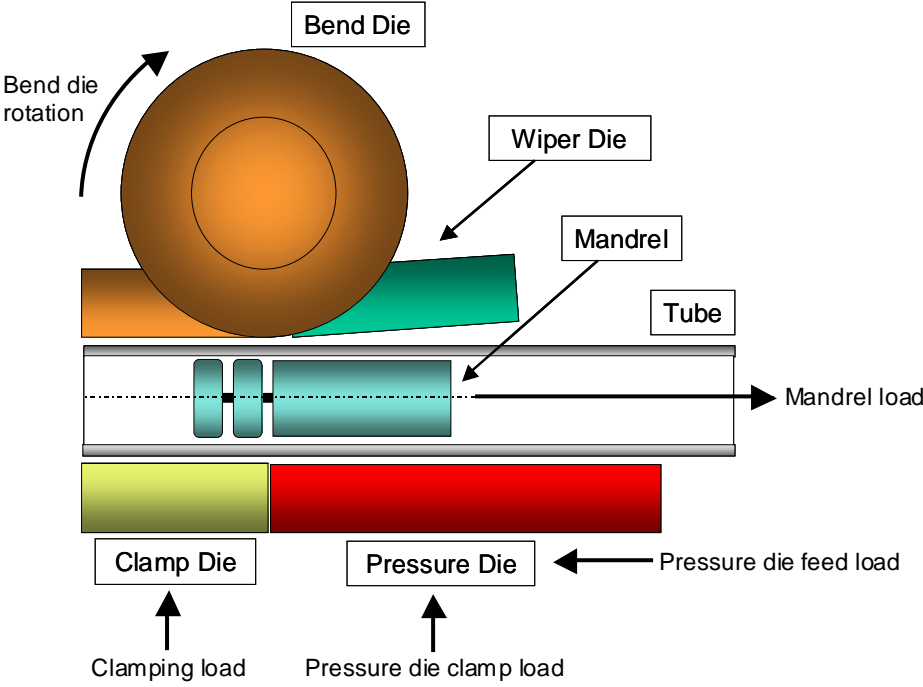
Schematic of the tools used in mandrel-rotary draw tube bending along with the directions of tooling loads (Oliveira, 2006a)
